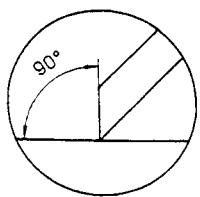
Welding chamfer at the bracing inside saddle
